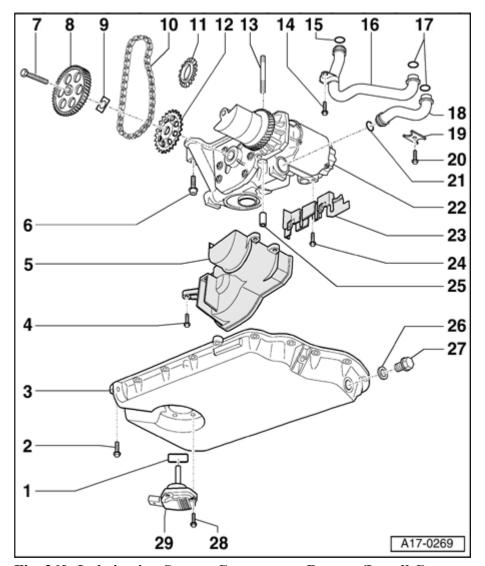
Lubrication System Components Remove/Install Components (Part I - Oil Pan (Lower Part),
